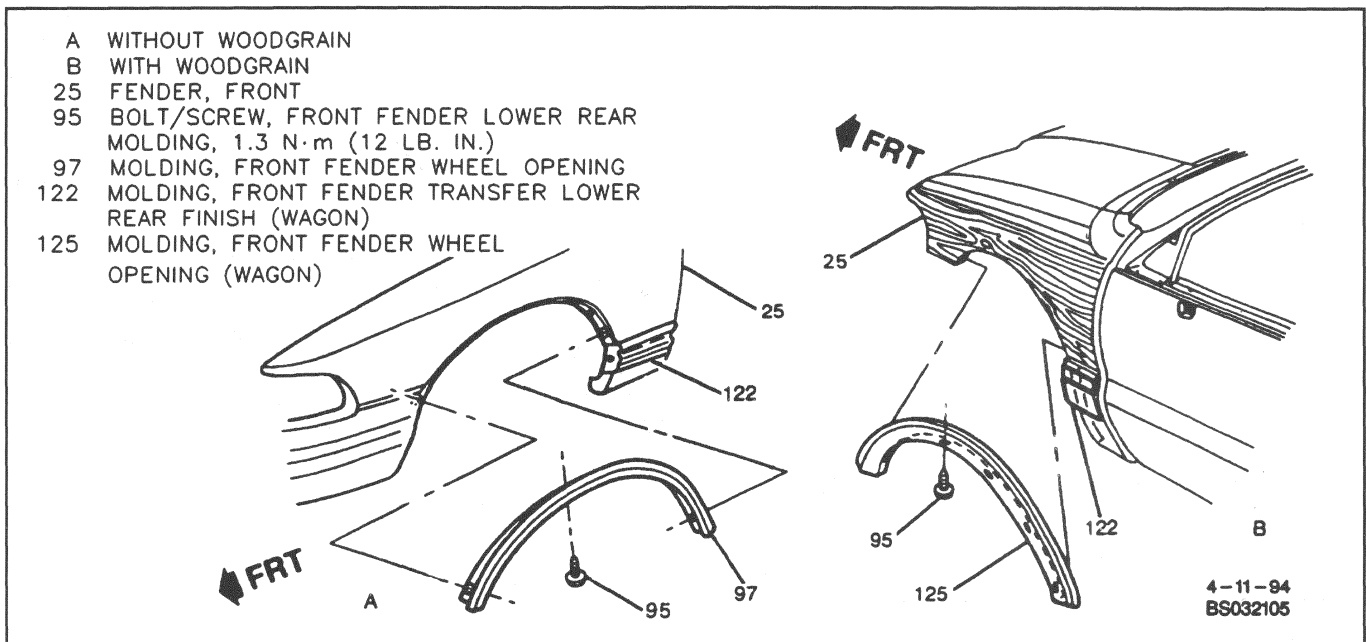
Front Fender Wheel Opening Molding-(Buick Wagon)
